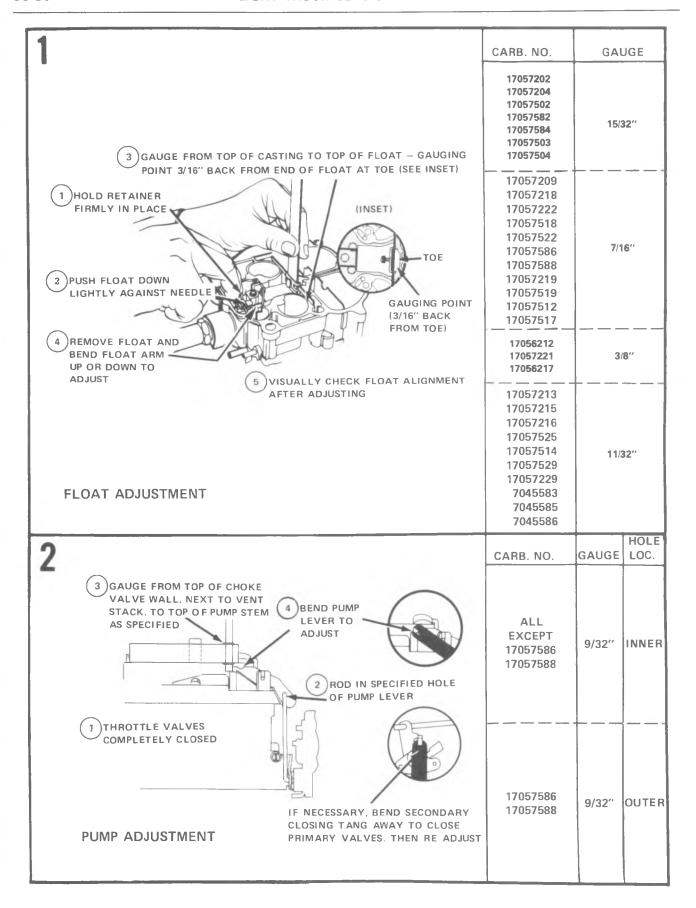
C-47--M4MC/M4ME/4MV Carburetor Adjustments-1 of 8
